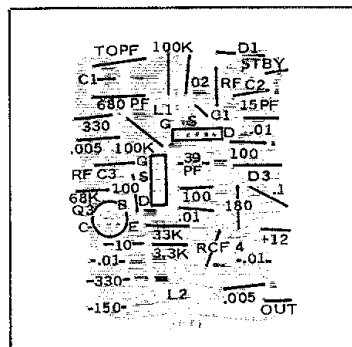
Scale layout of the VFO circuit board showing parts placement from the component side of the board.
